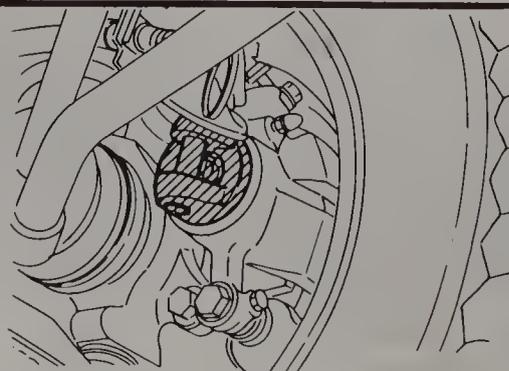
Front disc brake parking brake lever lubrication point (shaded area) (Sec 29)
